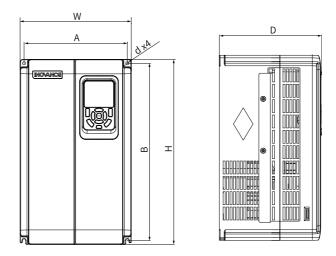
Outline dimensions and mounting dimensions of T5 to T6 models
